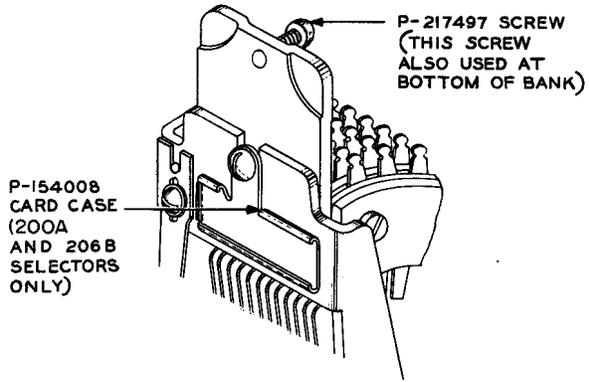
Card Case and Bank Mounting Screw for Rigid Mounting
